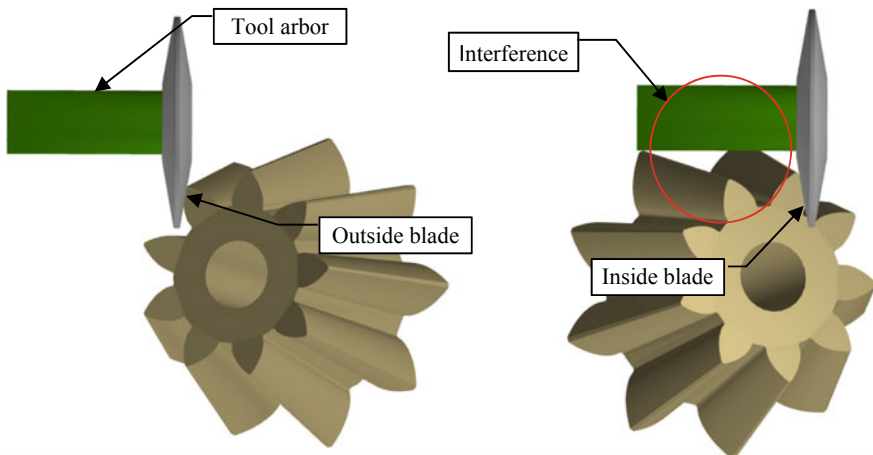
CoSIMT Toe/Heel chamfering with different blades—straight bevel gears
